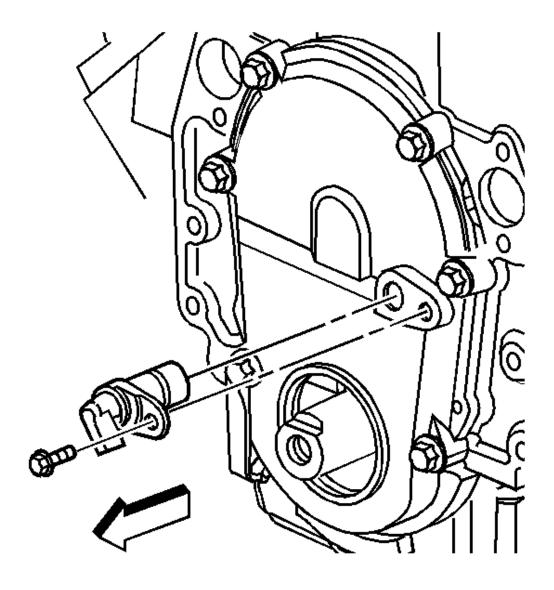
View Of CMP Sensor Courtesy of GENERAL MOTORS CORP.
